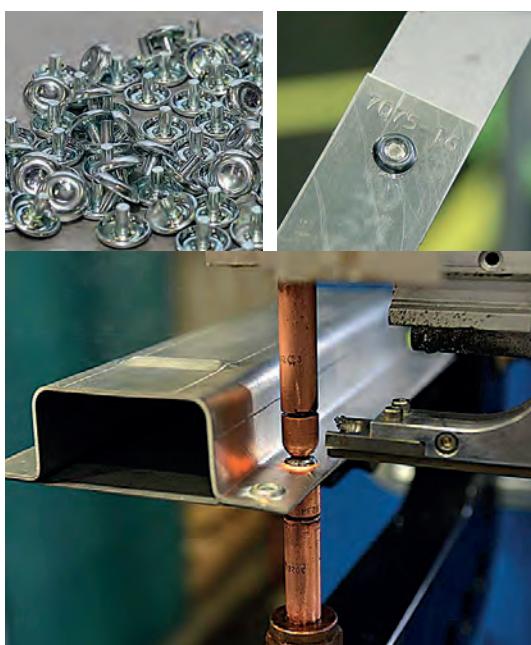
RSR technology uses a combination of spot welding and self-piercing rivets for joining different materials, e.g. steel to aluminium. A drawing pin-like steel rivet (top left) is used as a fastener which is pressed through a hole in the aluminium sheet (top right), and spot welded to the steel sheet (bottom).
